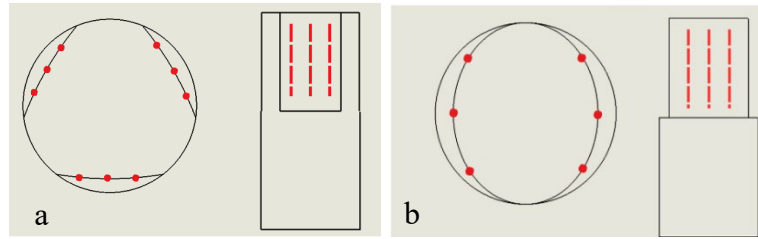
Roughness measurement point of shaft profile (a) P2; (b) PC3
